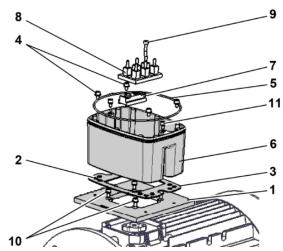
Assembly sequence: Connection box - adapter plate, size D
